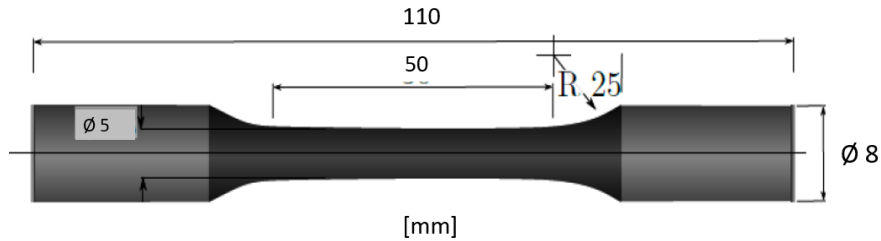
Sketch of tensile rods for tensile testing of 10mm screw extruded aluminium foil with dimensions. Modified from[28]
